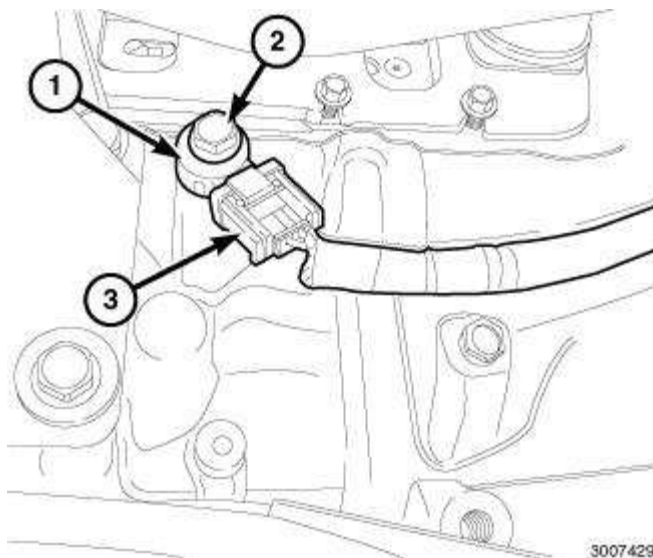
Knock Sensor, Electrical Connector & Bolt
